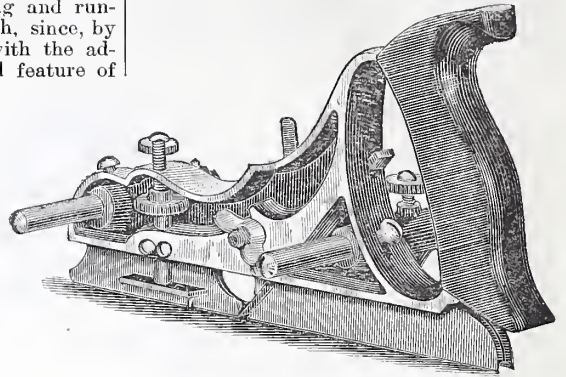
Elevation of the Opposite Side of Siegley's Plane.
